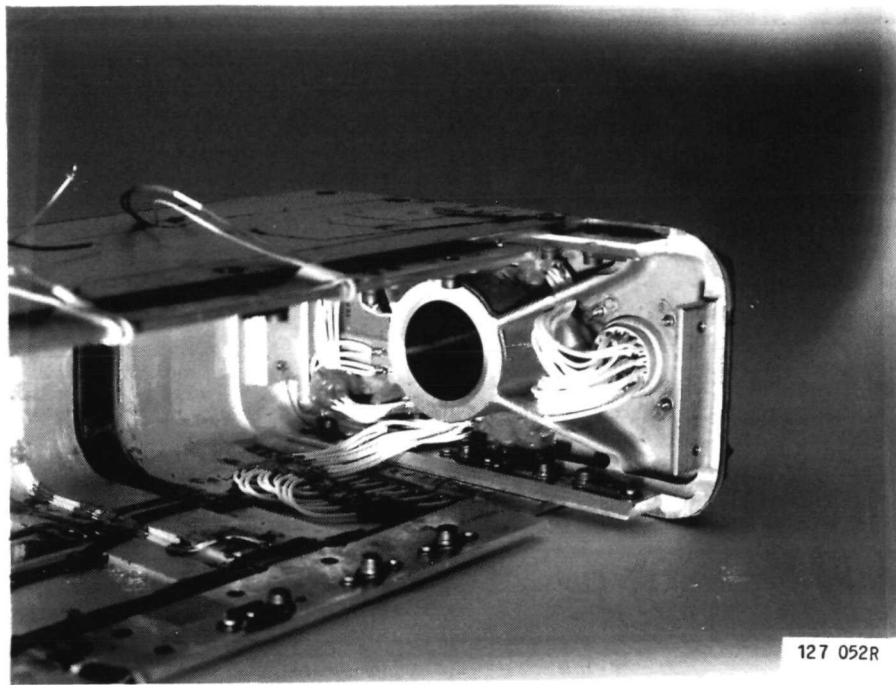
Assembly of inboard end bell to lower shell, three-quarter view of rear panel.
